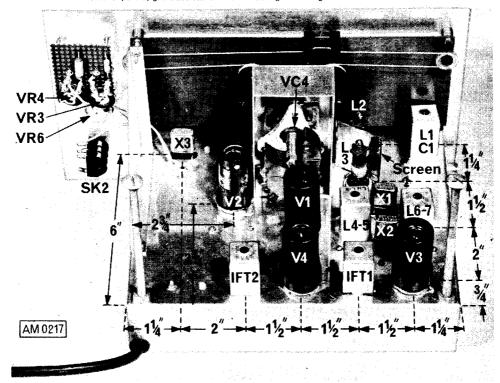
above. Location of the components mounted on the panel is shown in this photograph. The left hand edge of the chassis is indicated to show its position on the panel. Fig. 7: below, identifies the components mounted on top of the chassis. The long bolts, subsequently removed, are of great assistance when working on wiring etc. inside the chassis.
